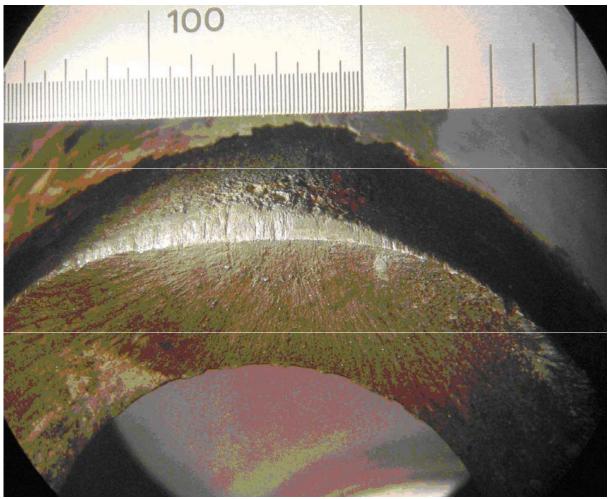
Photo 3, A tiled magnified view of the fracture surface showing pitting corrosion coincident with the area at the origin of the fracture
